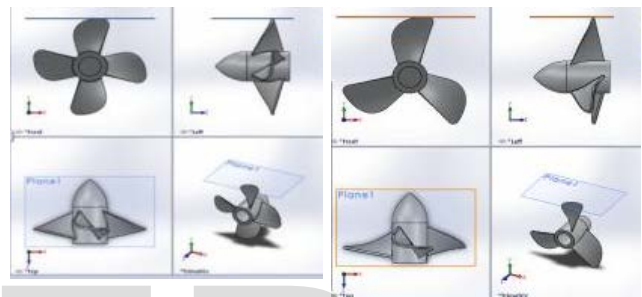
4 bladed propeller Fig. 4.4 3 bladed propeller
